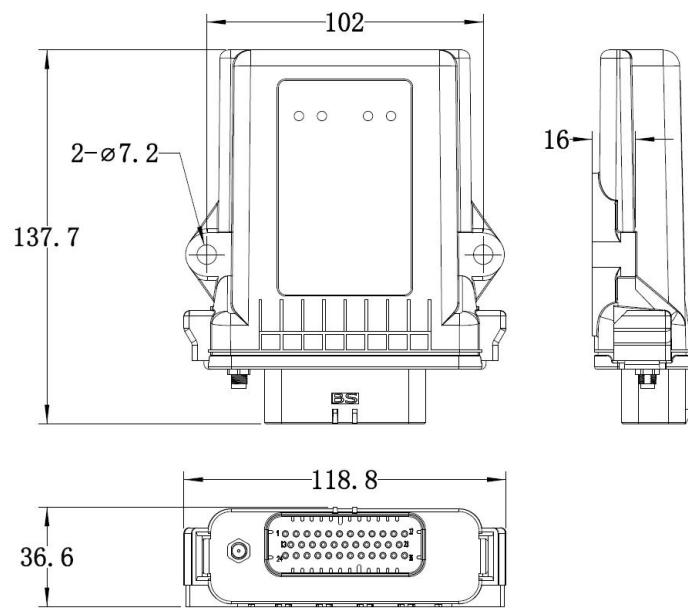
Dimensional drawing of RBS908-M1 series receiver system
